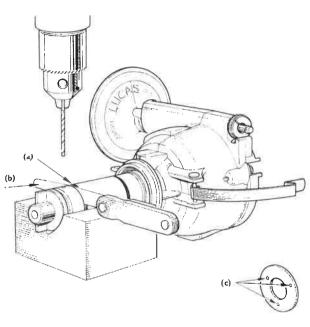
Drilling the shaft (b) 0.002" (0.05mm) Gauge
